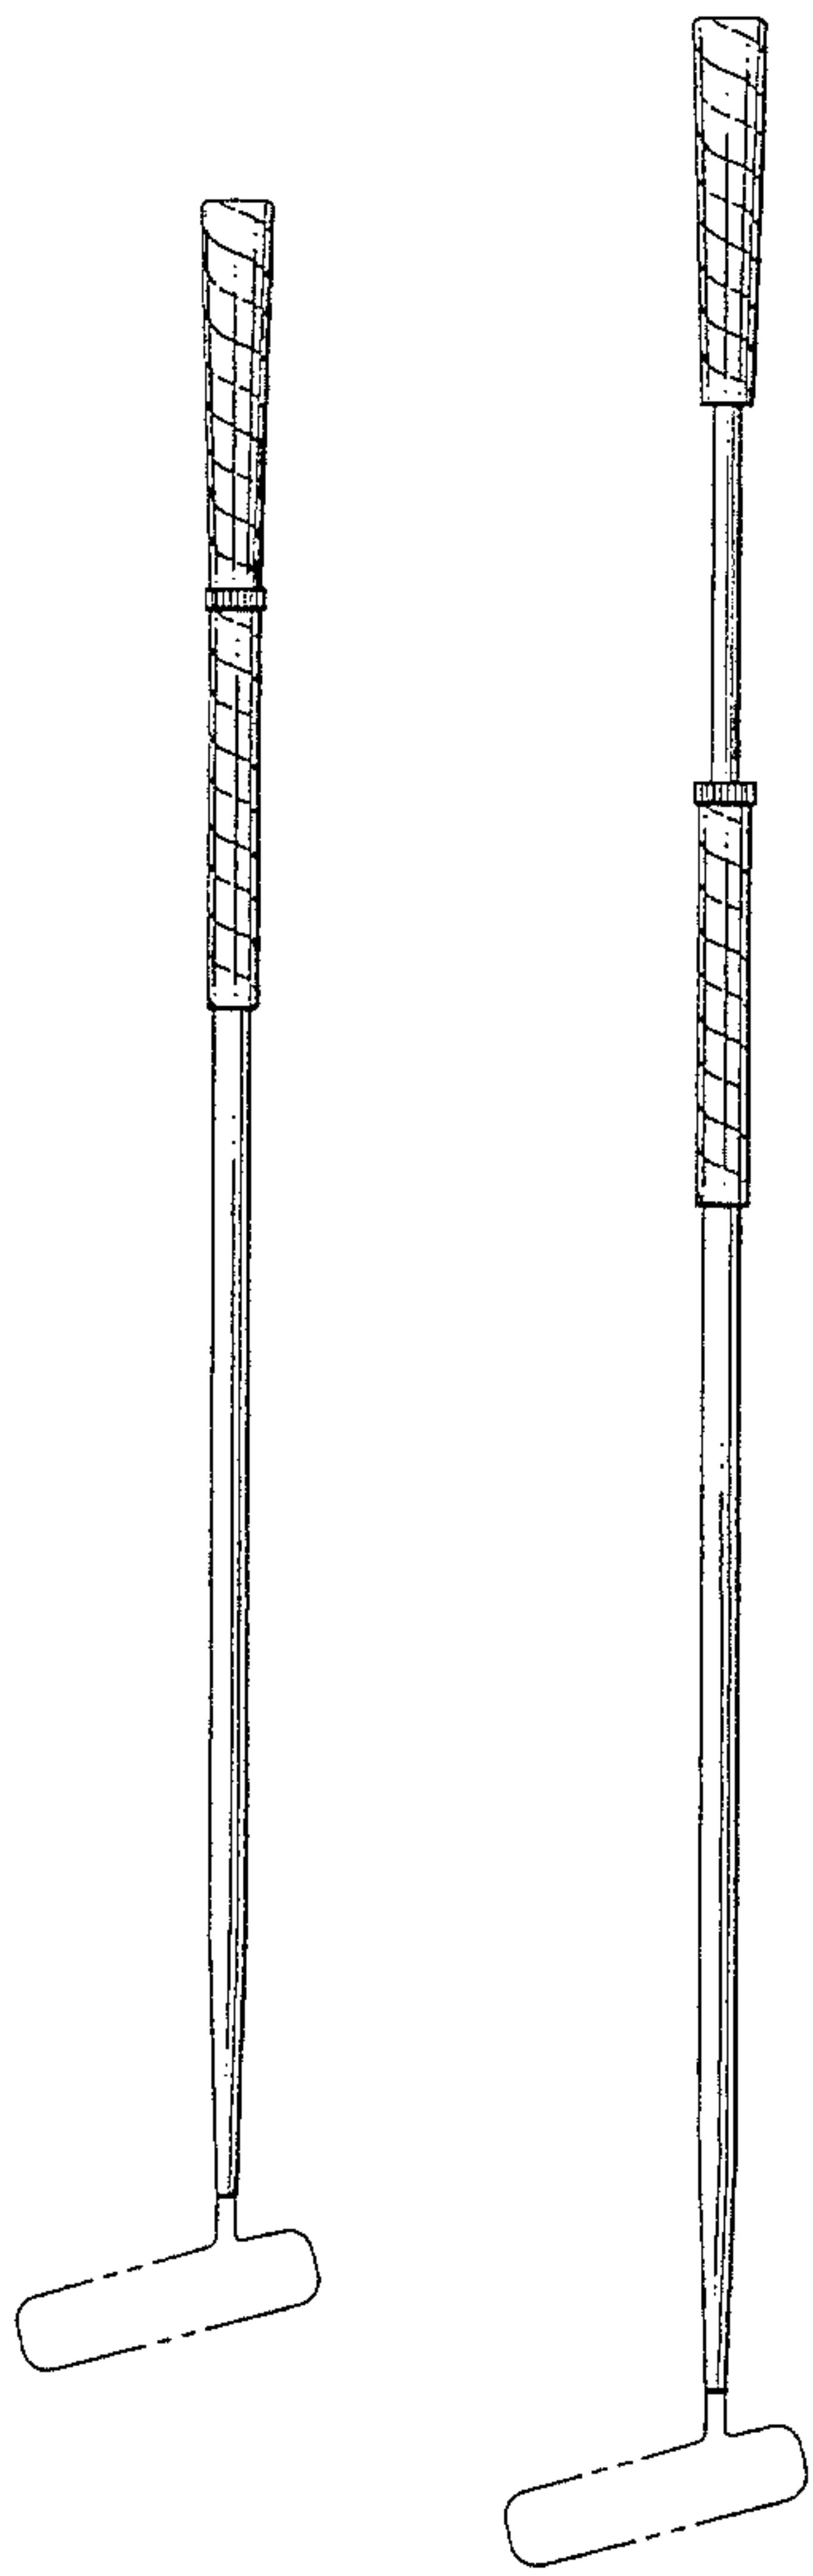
is a front elevational view with the shaft shown in an extended position for clarity of illustration;
